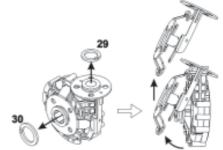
E - Disassembly of the protection flange for the flanged execution
